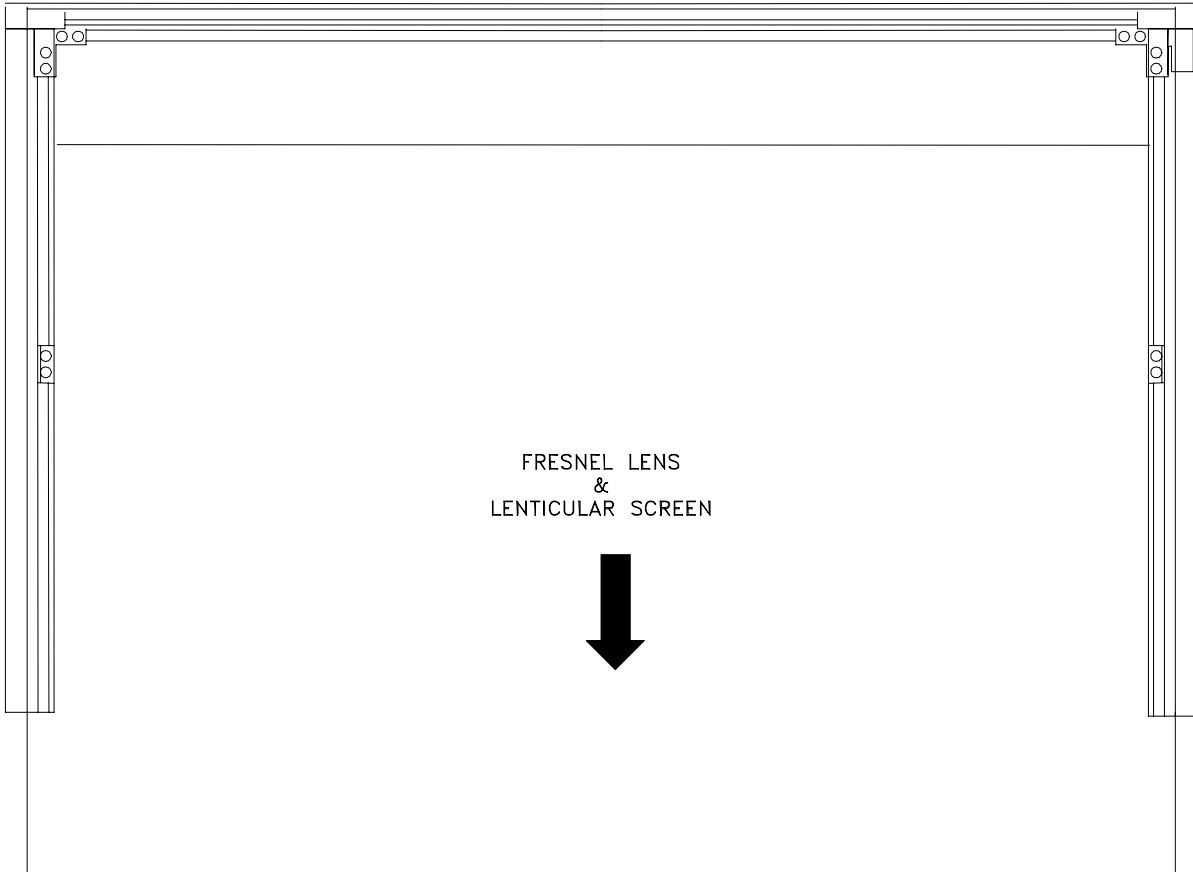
Lenticular Screen & Fresnel Lens Removal (Rear View)
